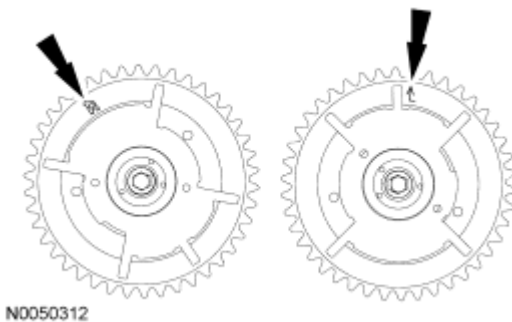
Rotating Camshaft Sprockets To Position RH Camshaft Sprocket Timing Mark
